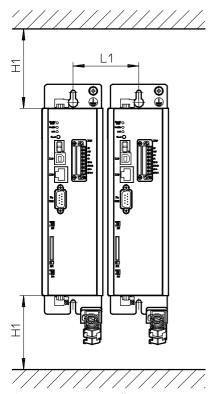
Motor controller CMMP-AS-...-MO: Mounting distance and installation clearance
